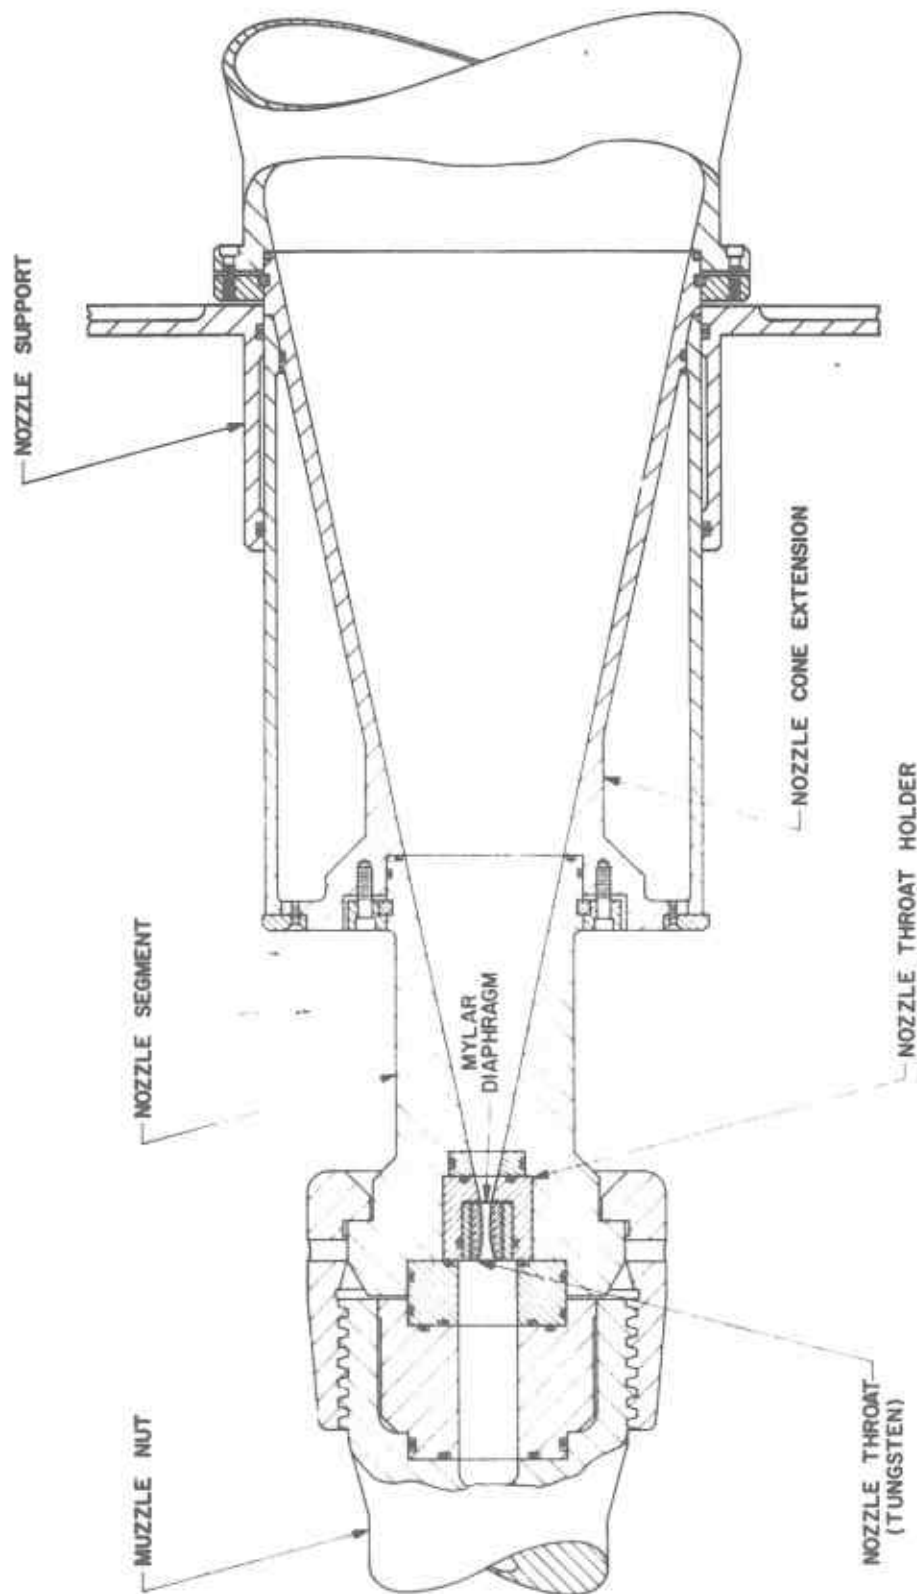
FIG. II NOZZLE SECTION OF THE 1.5-IN.
